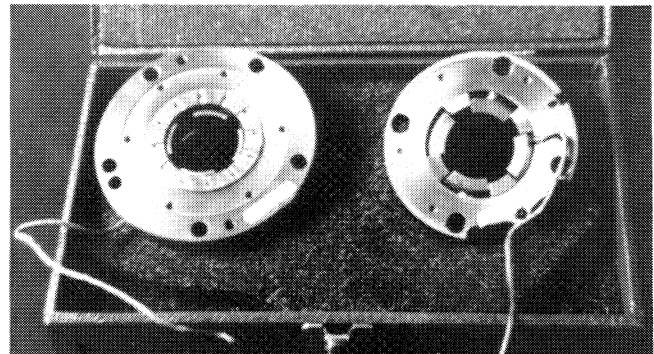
Photograph of Complete New Phase One Journal and Thrust Bearing Retrofit Conversion.
